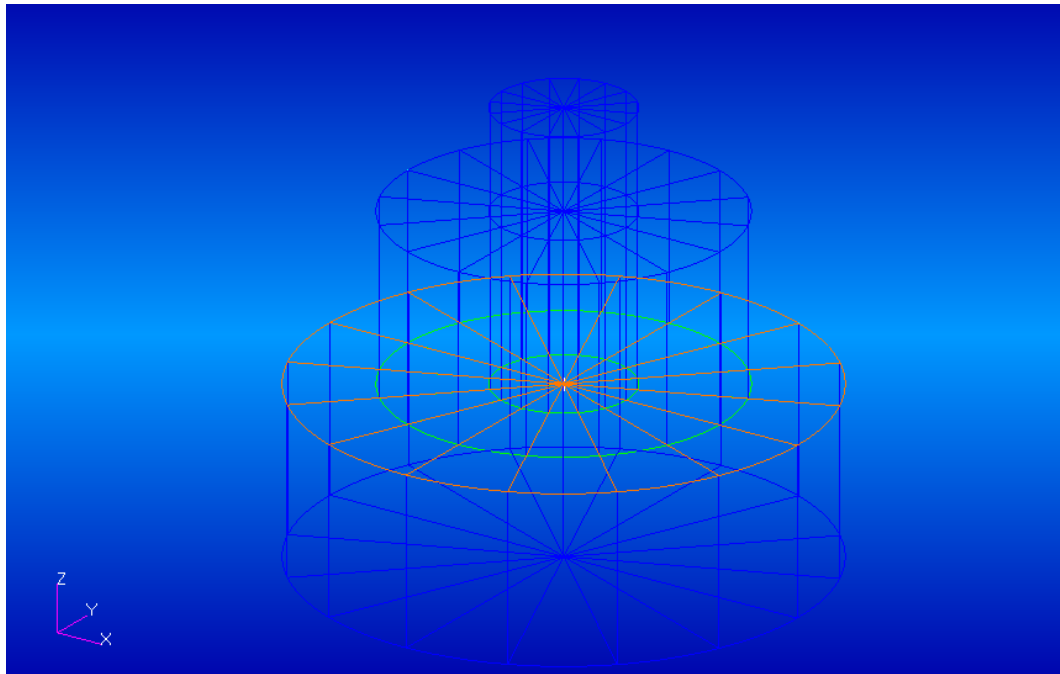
Wireframe view of smooth probe tool used in FEA model.
